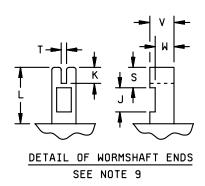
Outline drawing of electron tube type 2J51A - Continued.
